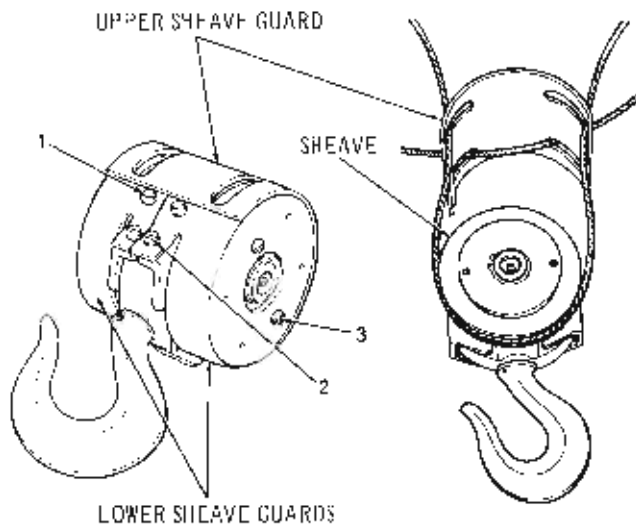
Installing Wire Rope in Double Reeved Bottom Block
